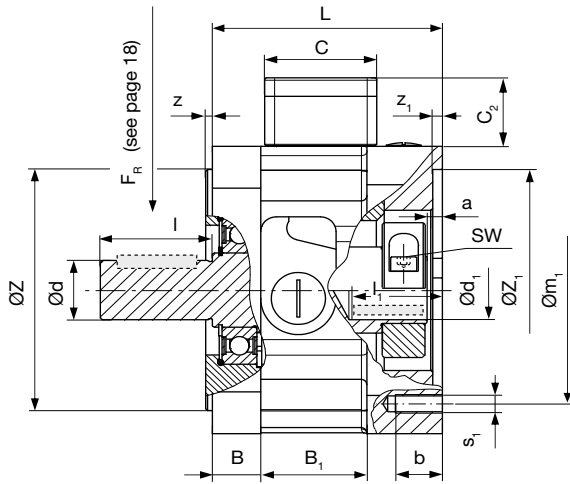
Type 899.000.0_ Single circuit brake with bearing-supported clamping hub shaft
